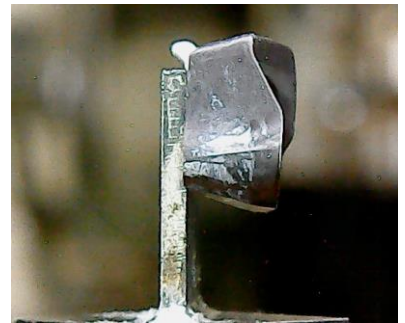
Cast Iron – Tools – LN2 – Scrub.
